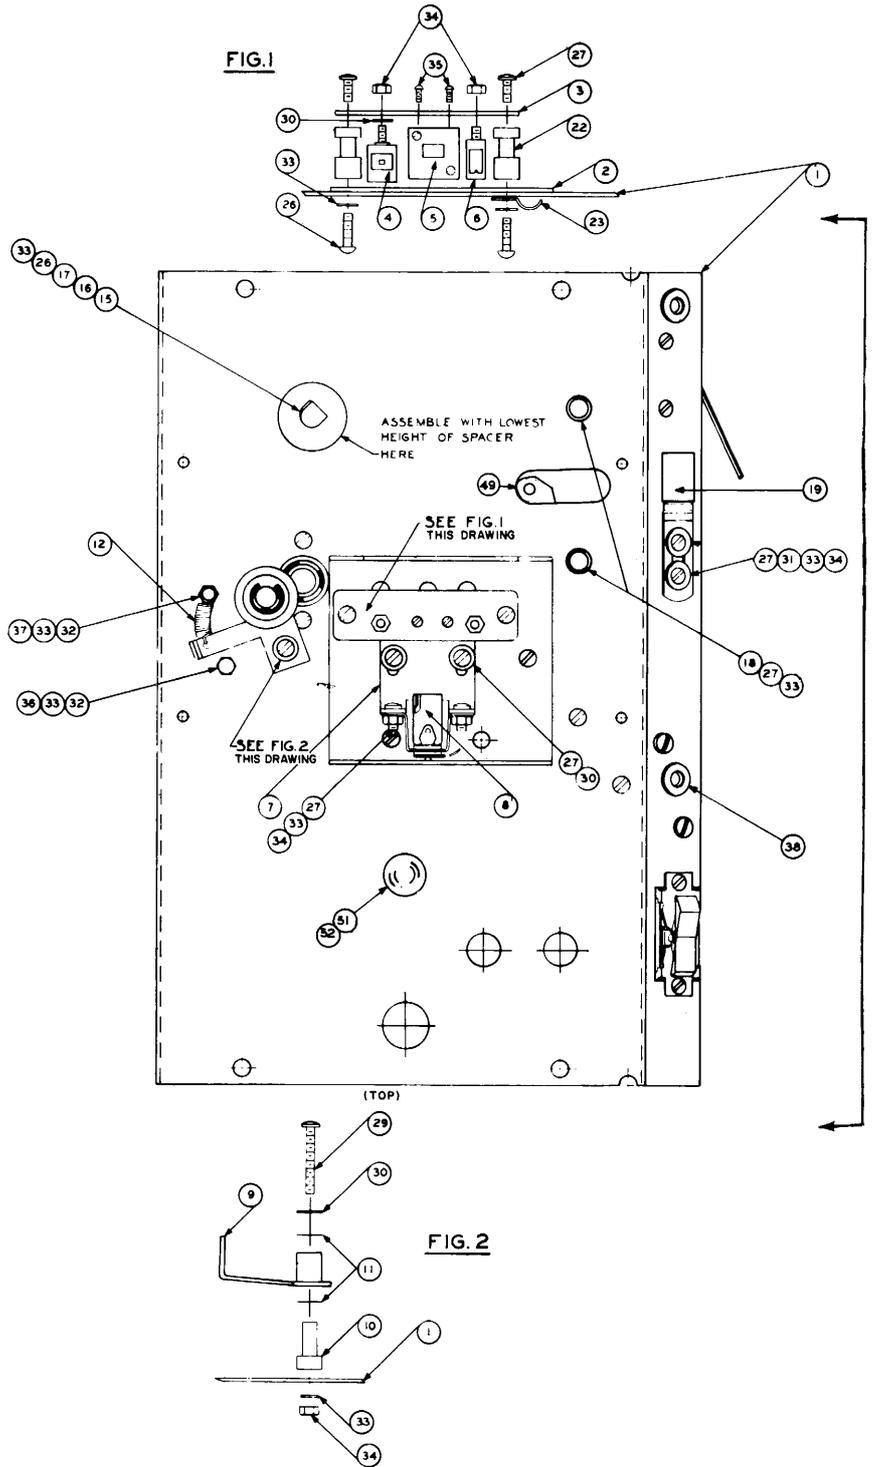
Motorboard assembly, WW-5798-1 (part of motorboard wiring assembly, figure 5).
